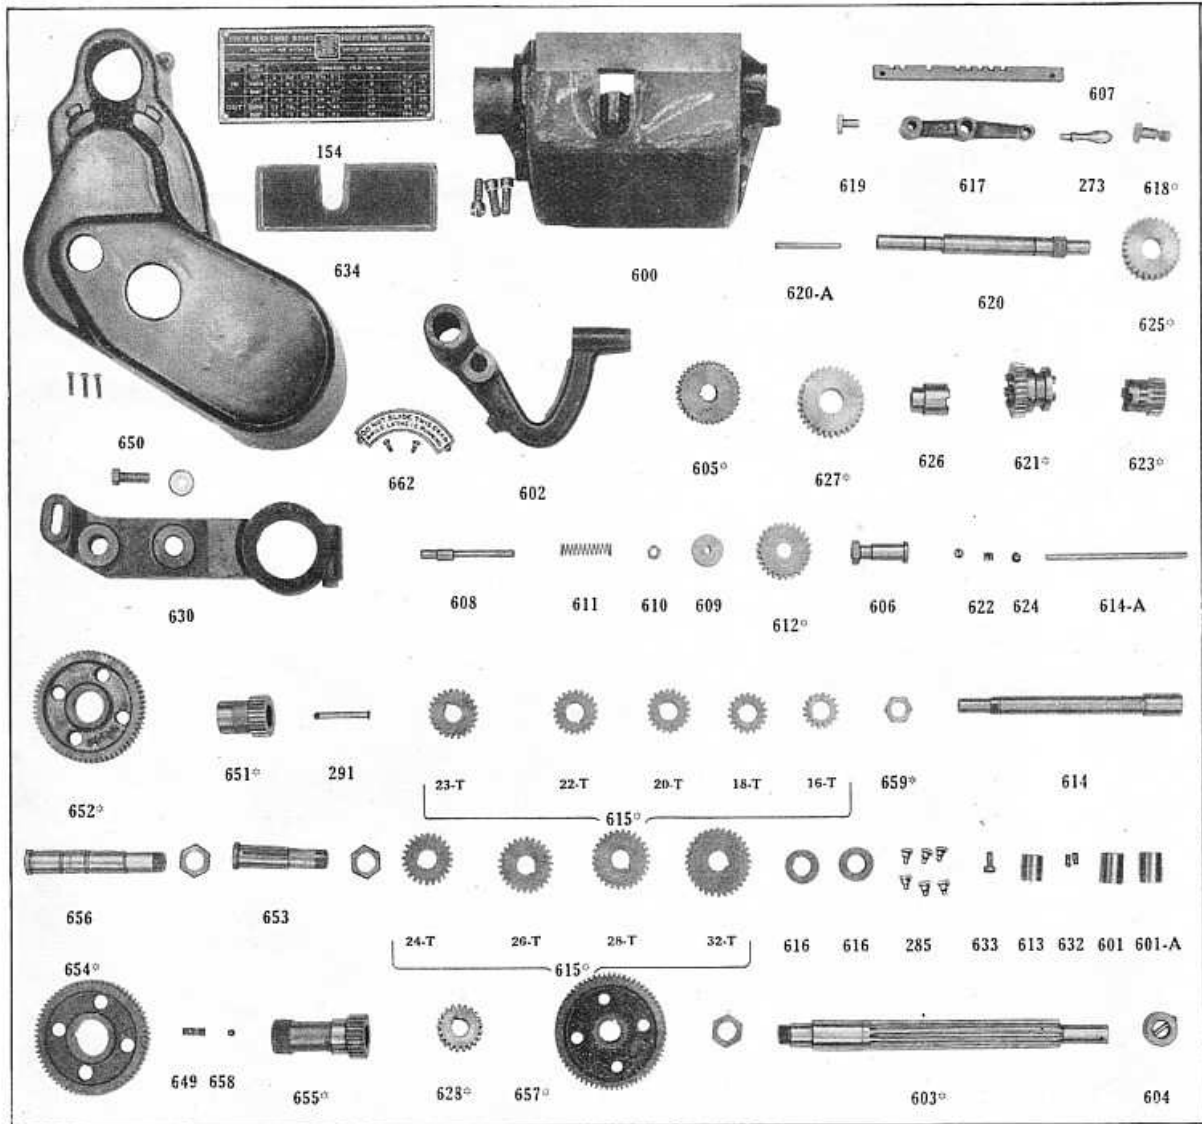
Quick Change Gear Box Parts for South Bend Quick Change Gear Lathes.
